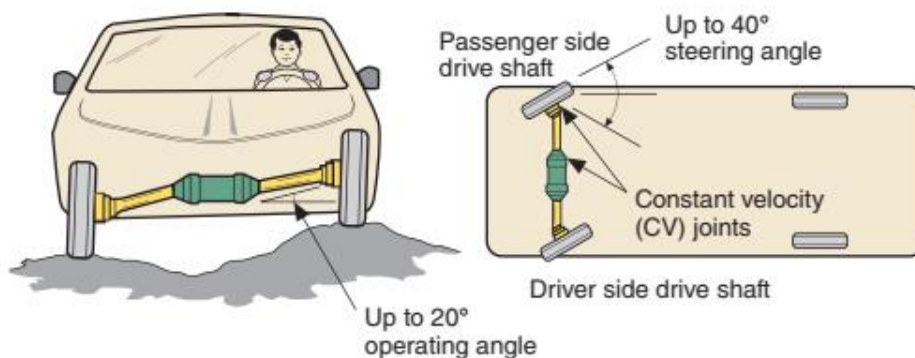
Constant velocity (CV) joint of typical front wheel drive axle including outboard and inboard CV joints
